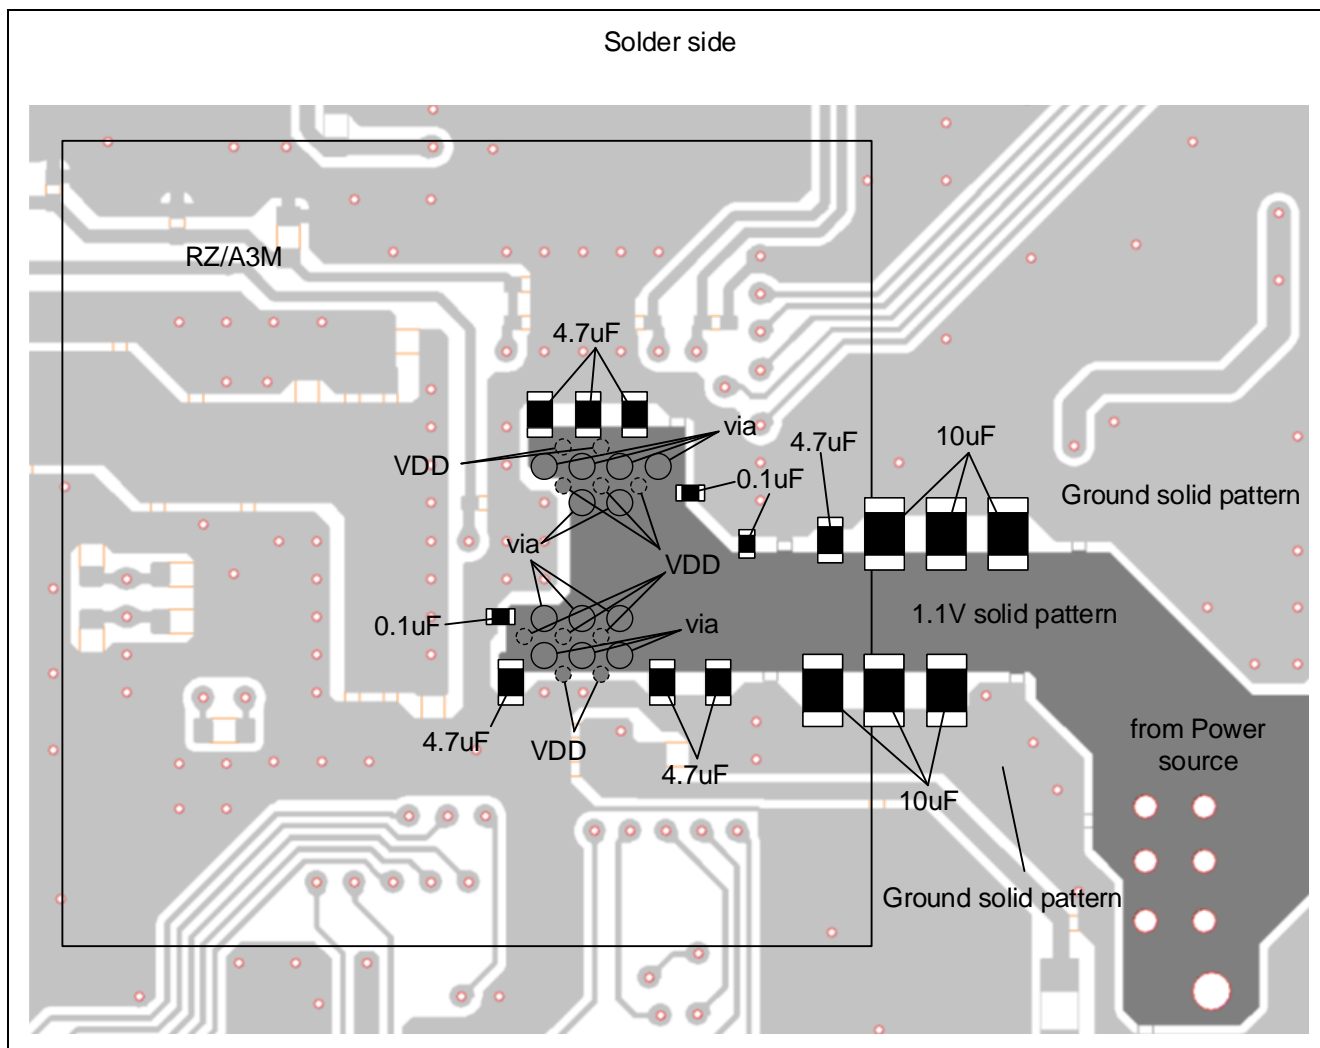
Pattern image of Core power supply (VDD) and external parts (Solder side)
